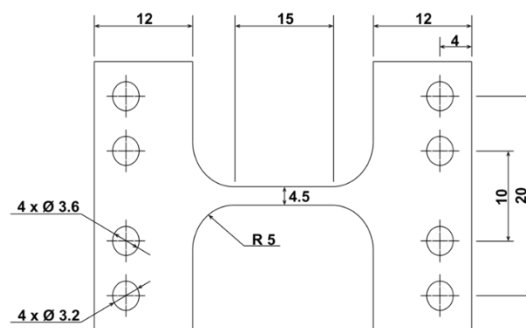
Schematic illustration and dimensions of dog bone specimens. Dimensions indicated are in mm.
